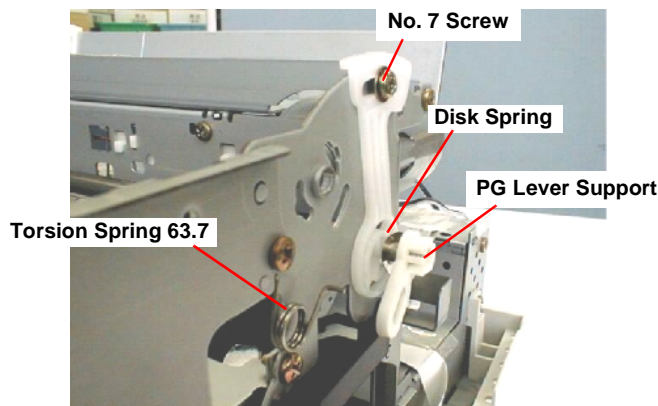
Removing the Torsion Spring 63.7 & PG Lever
